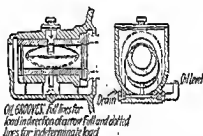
Ring-oiled Bearing Solid Bushing.
